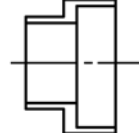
Fittings (see Tables 5 and 6 for dimensions)
